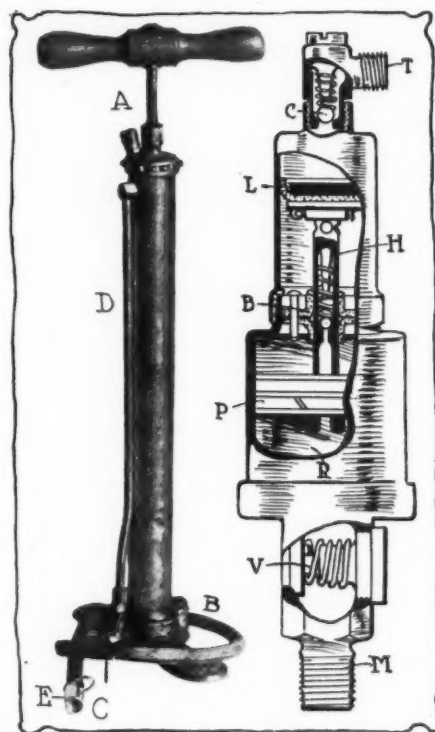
Left—Stocker pump. Right—Mayo spark-plug pump
